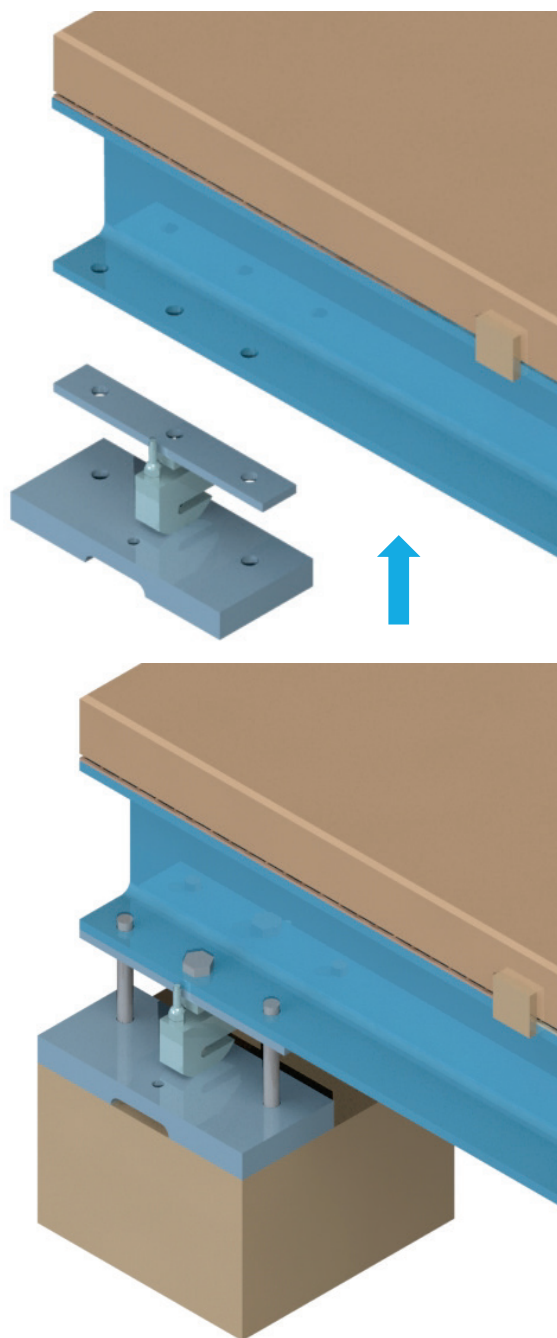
Complete assembly of load cells onto structure. Above: Exploded View. Below: Isometric view.
